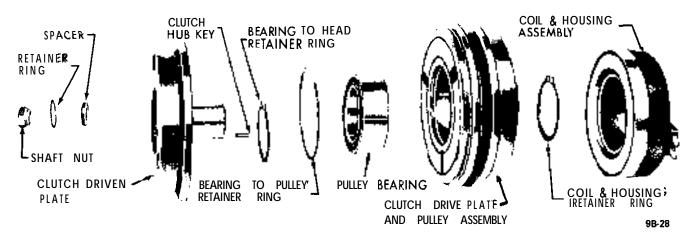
B-32 Magnetic Clutch and Pulley Assembly
